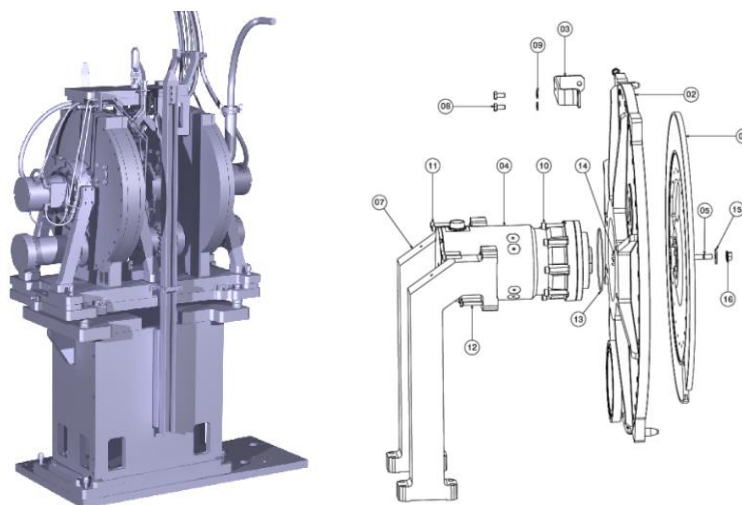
PWD-PS (in-bunker) chopper module, and exploded view of the first PWD disk obtained from Aernnova drawings.
